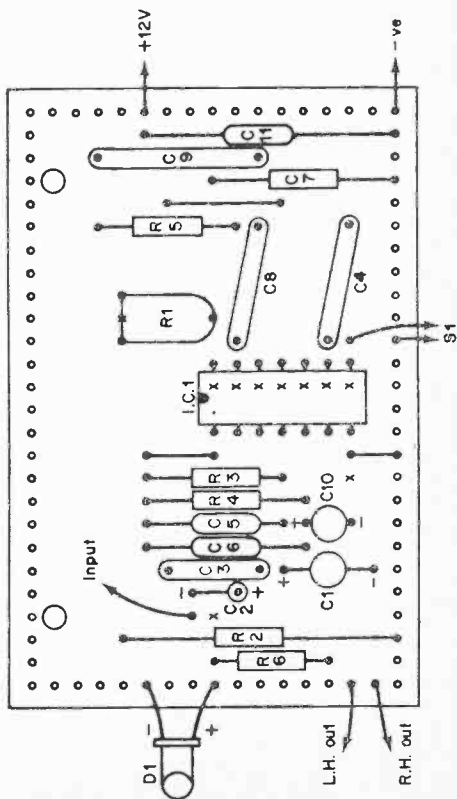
The 0.1 in. pitch stripboard component panel for the stereo decoder.
